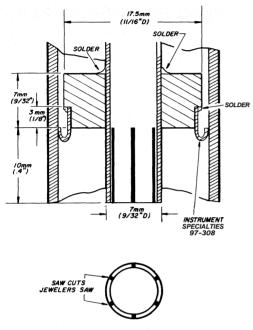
Close-up view of the fingerstock assembly. If brass shim stock is used instead of fingerstock, the size of the brass ring can be changed to compensate for the size difference.
